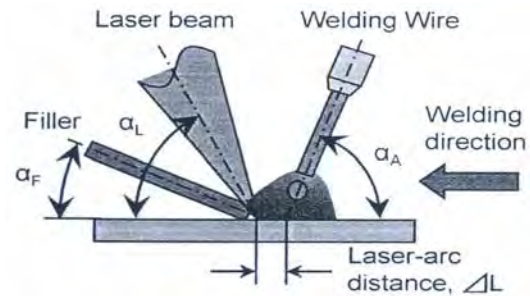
Schematic of Filler-aided Laser-Arc Hybrid Welding [10]
